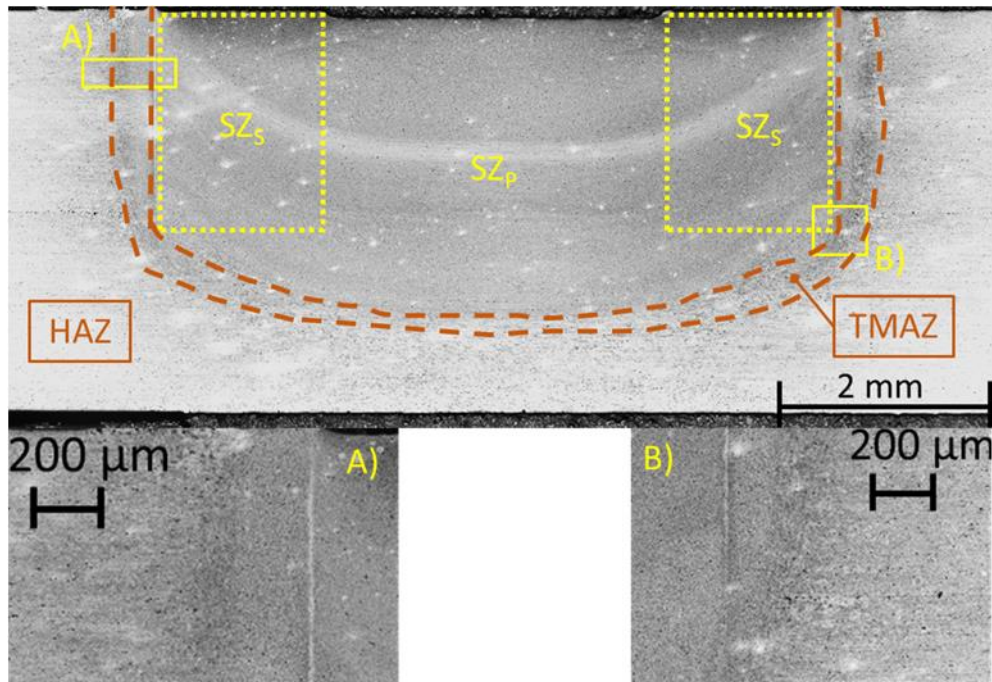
Cross-section of RFSSW AA2024-T3 welding condition W3 (RS = 1000 rev/min; PD = 2.4 mm):
